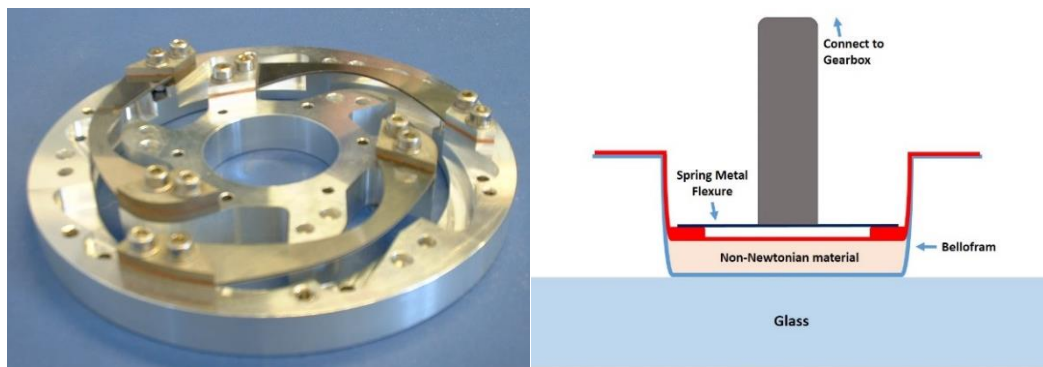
An example of spring metal flexure (up) and assembly drawing (down).
